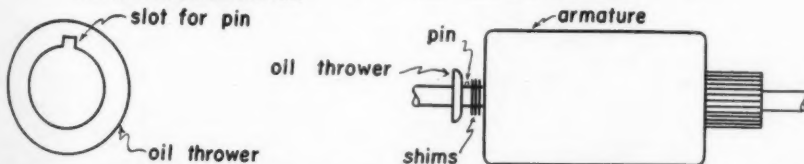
ILLUSTRATING HOW OIL THROWER IS SLOTTED TO FIT OVER A PIN IN THE ARMATURE SHAFT. IF THROWER ISN'T SET OVER PIN, END BELL OF MOTOR MAY BE CRACKED WHEN MOTOR IS ASSEMBLED.
